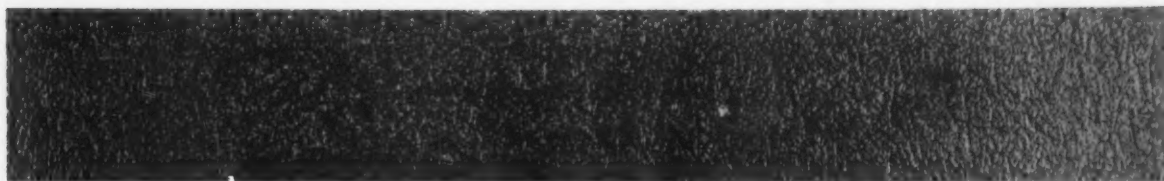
Typical etched longitudinal section from a plate 1 in. thick and 60 in. long. Section taken from about 24 in. to 42 in. from riser end. Heat 3.
